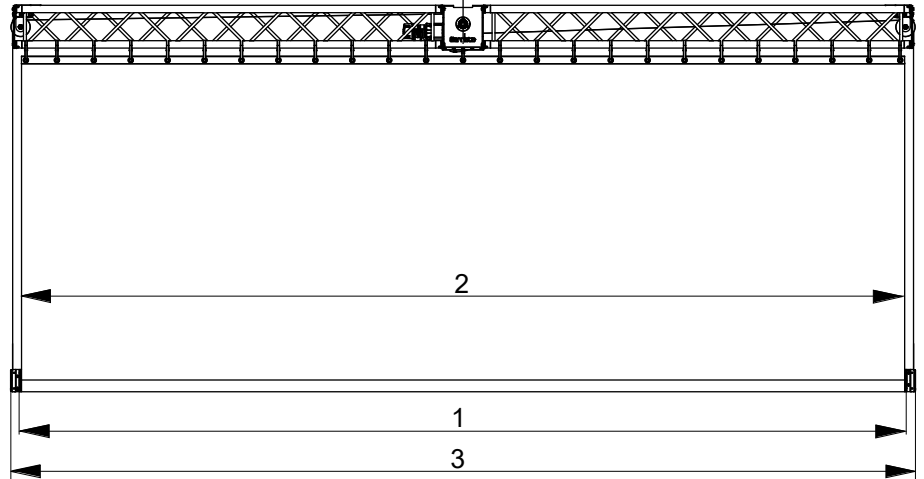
Roller screen MEGASCREEN S – Dimensions front view
